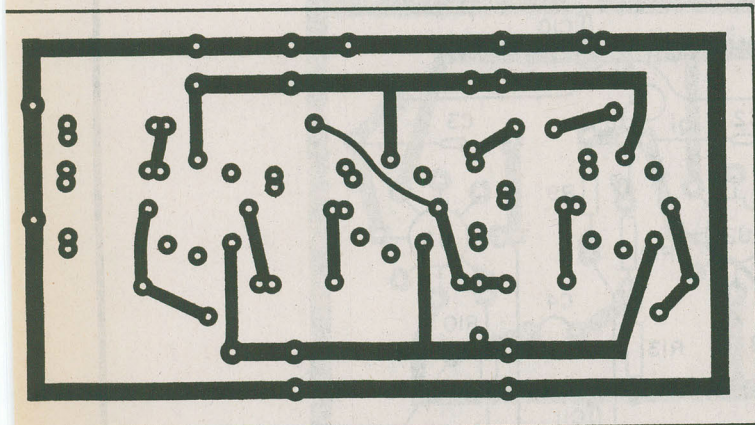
This is the exact-scale template for etching the filter board. Use a number 67 drill bit for all component-mounting holes.
